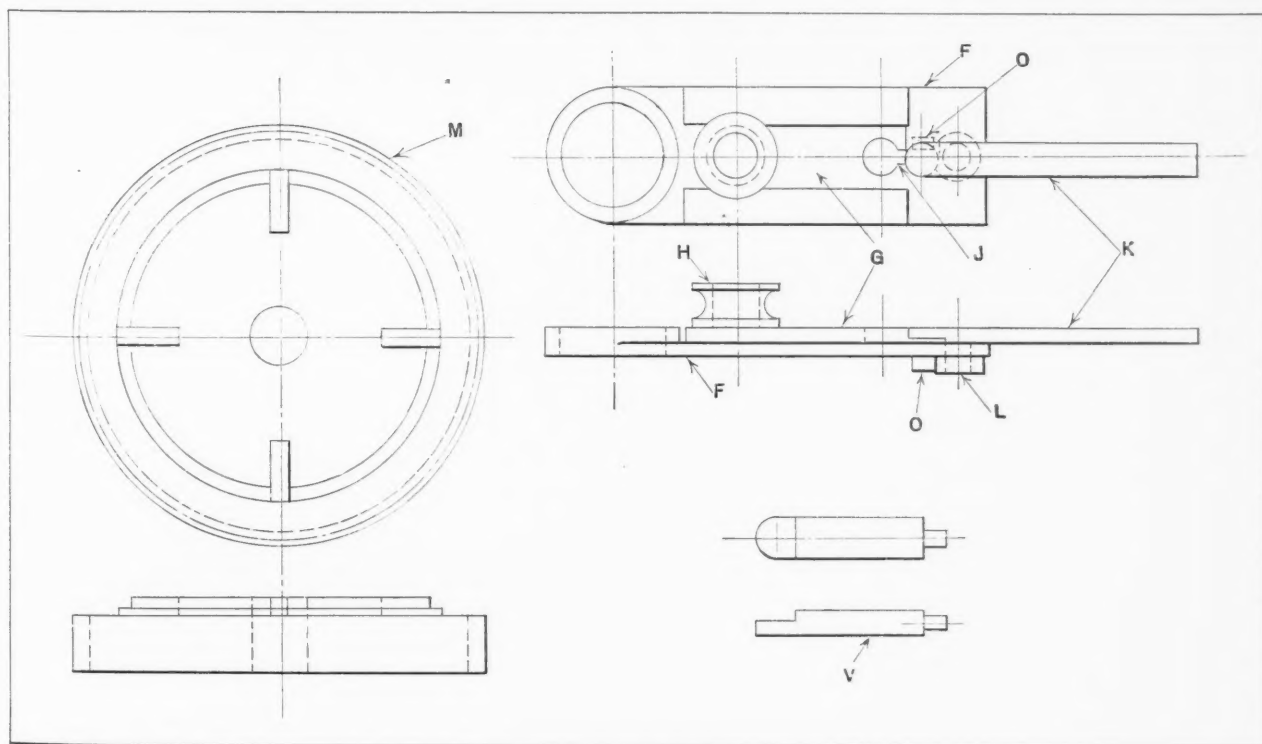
Parts of Pipe Bending Machine Illustrated in Fig. 3
